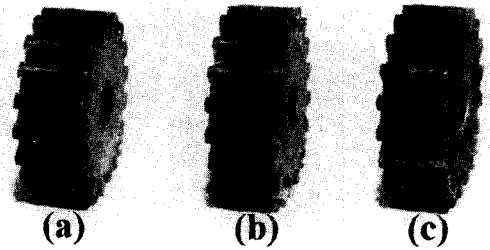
Cold forged spur gear (clamping type, h=10mm)
